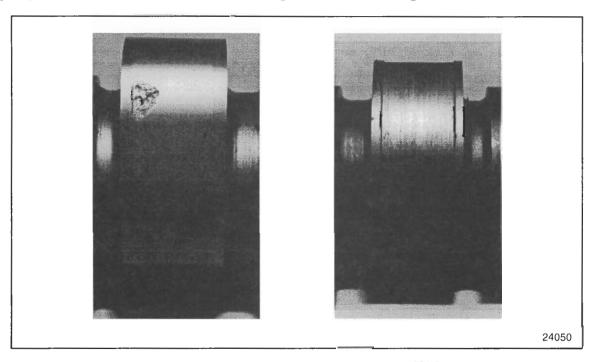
Camshafts Exhibiting Surface Pits on the Exhaust Lobes
